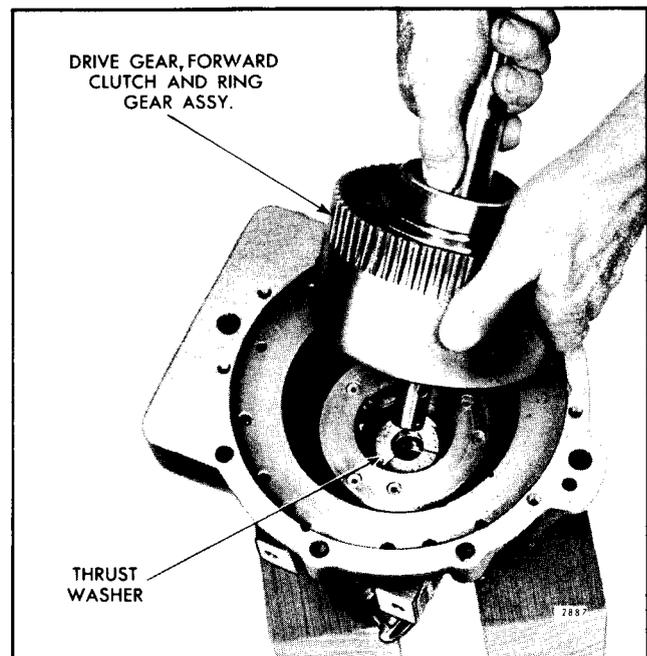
Installing Planetary Ring Gear, Forward Clutch and Drive Gear Assembly in Reverse Gear Housing
